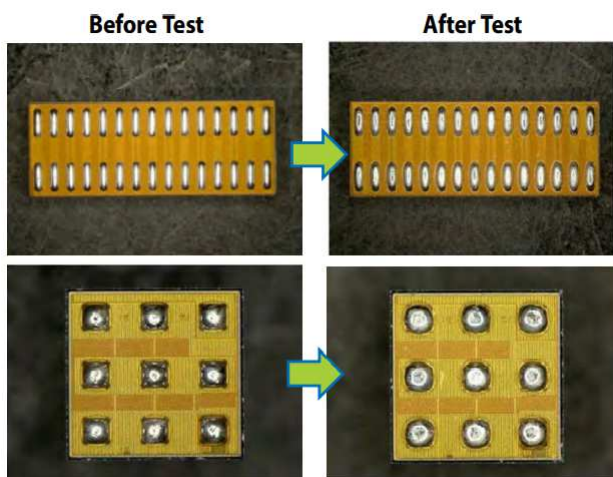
Solder pads for EPC2206 and EPC2214 before and after solderability test. Note that solder paste has been incorporated, leaving a smooth and uniform finish absent of visual defects.
